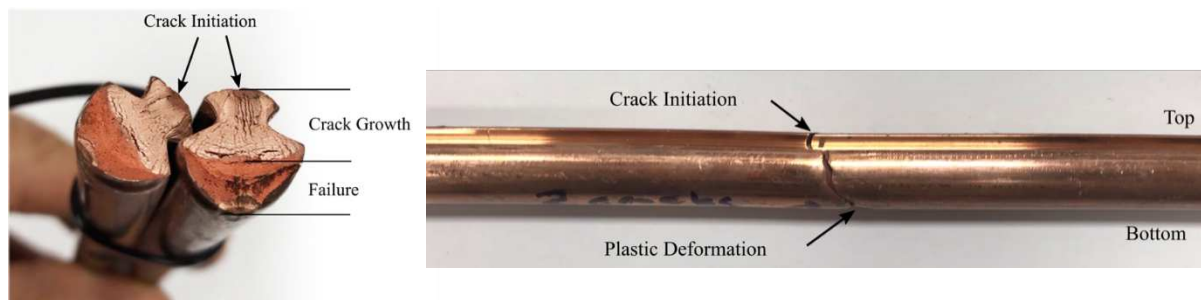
Fracture surface and stages in the contact wire after fatigue testing
